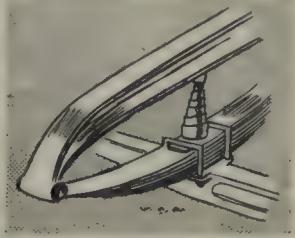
The Nevajah spring buffer in position on a front spring.
